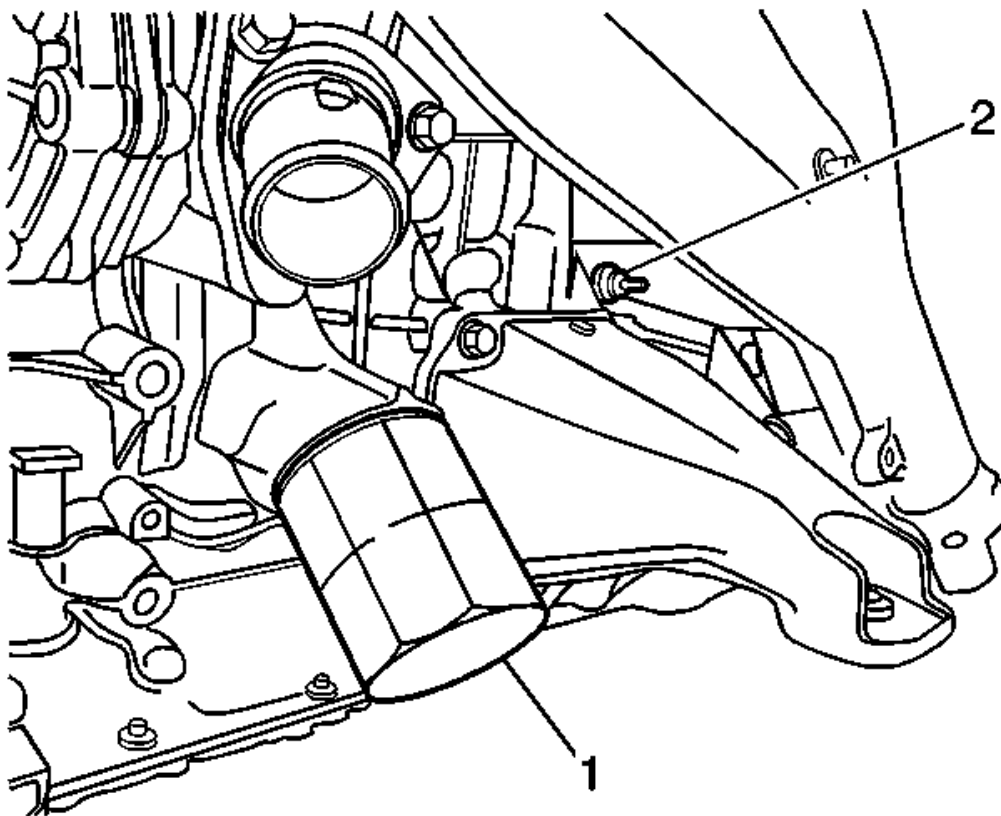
View Of Oil Pressure Switch & Oil Filter
